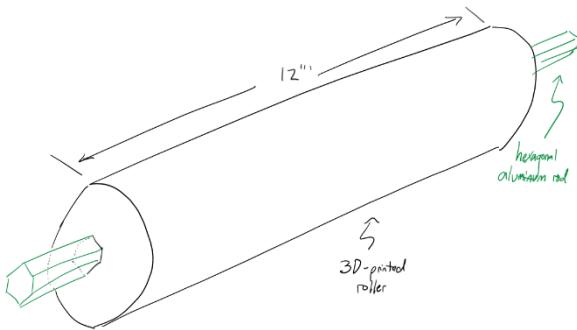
Concept drawing for the roller assembly (drawing applied to both the drive and idler rollers). The drawing depicts the central hexagonal aluminum rod which runs through a 3D-printed cylindrical roller which the conveyor belt presses against.
